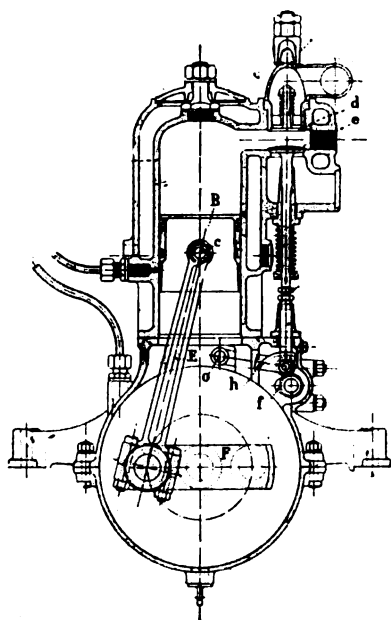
SECTION OF PETROL MOTOR WITH ORDINARY SUCTION INLET VALVE.
